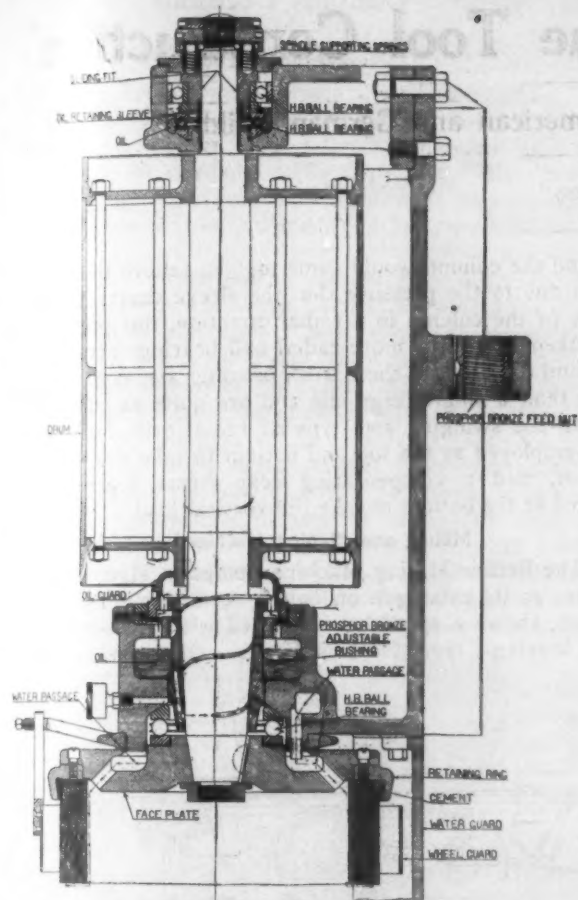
Spindle of the Vertical Surface Grinder Built by the Blanchard Machine Company, Cambridge, Mass.
